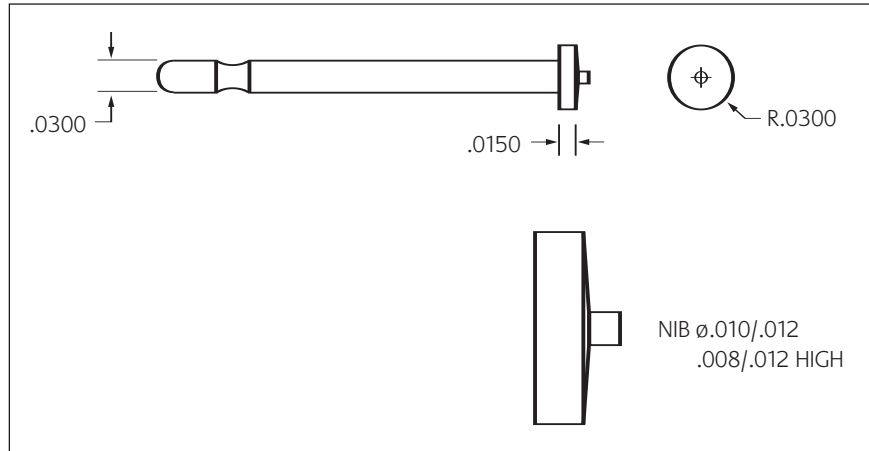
Sketch of nib arrangement for fusion welding. (Courtesy J. Alves)
